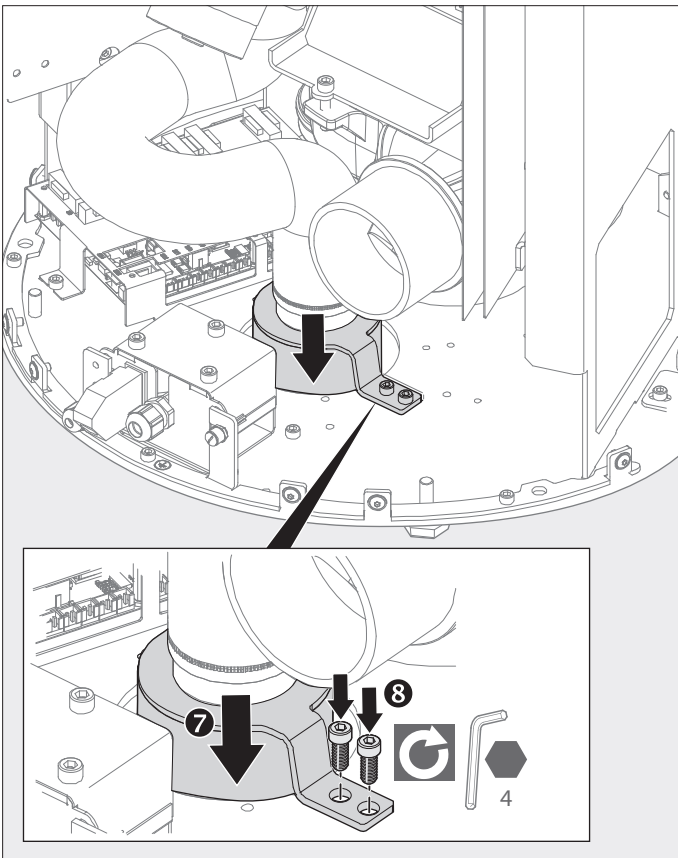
Screw the combustion air nozzles onto the base plate
